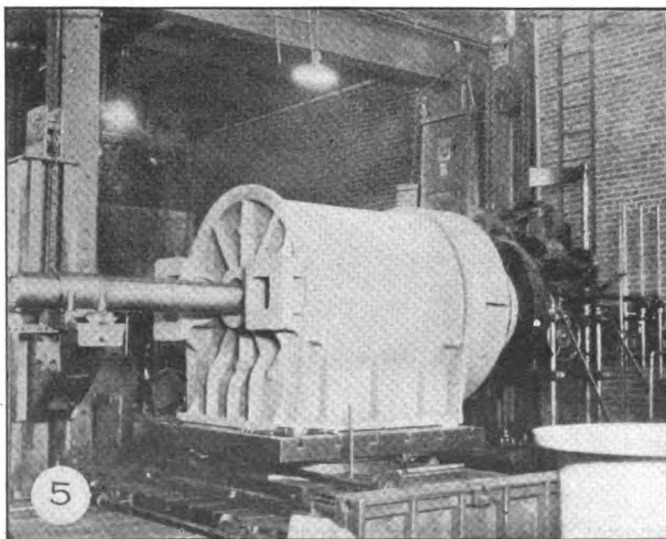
THIS LOW PRESSURE CYLINDER IS BEING BORED ON A HORIZONTAL MILL—FIG. 6—THIS SHOWS HOW CYLINDER HEADS ARE TURNED IN THE LATHE
